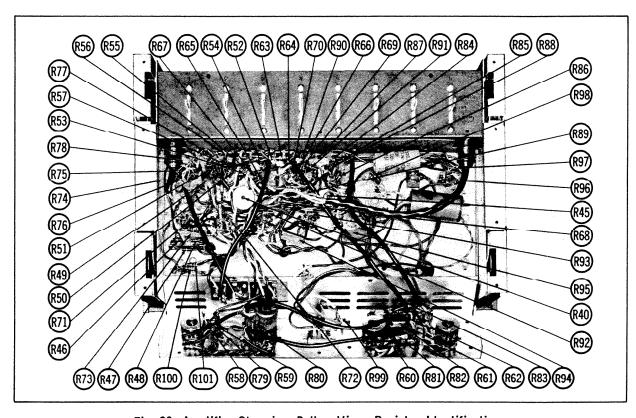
Amplifier Chassis - Bottom View, Resistor Identification.
